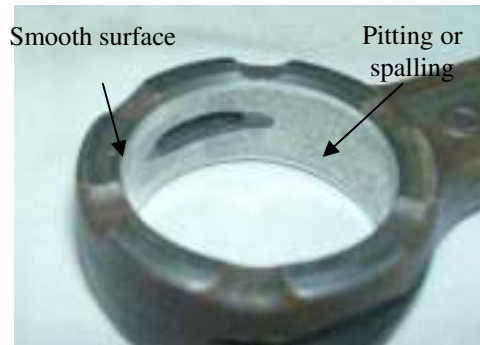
Cylinder arm damaged by contact fatigue [Minho Univ.].
